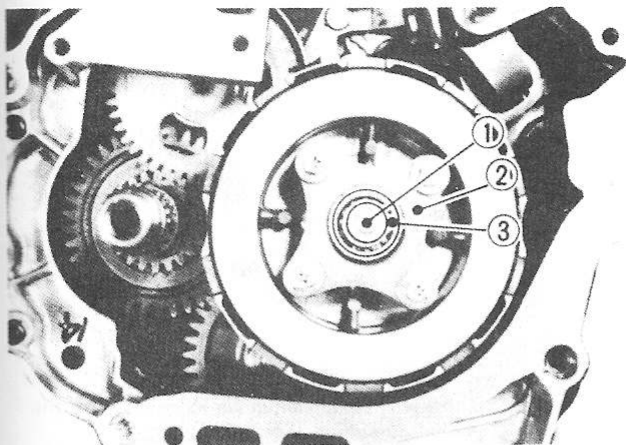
B.26 Remove the pushrod (1) and the bearing (3) before removing the spring plate (2) (Sec 13)
